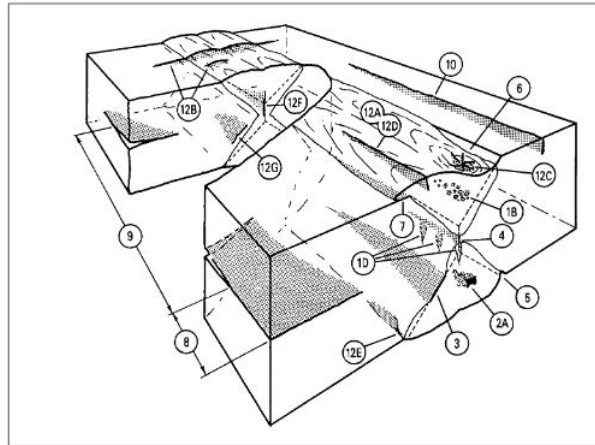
Discontinuities in a Double-V-Groove Weld in a Butt Joint [25]
